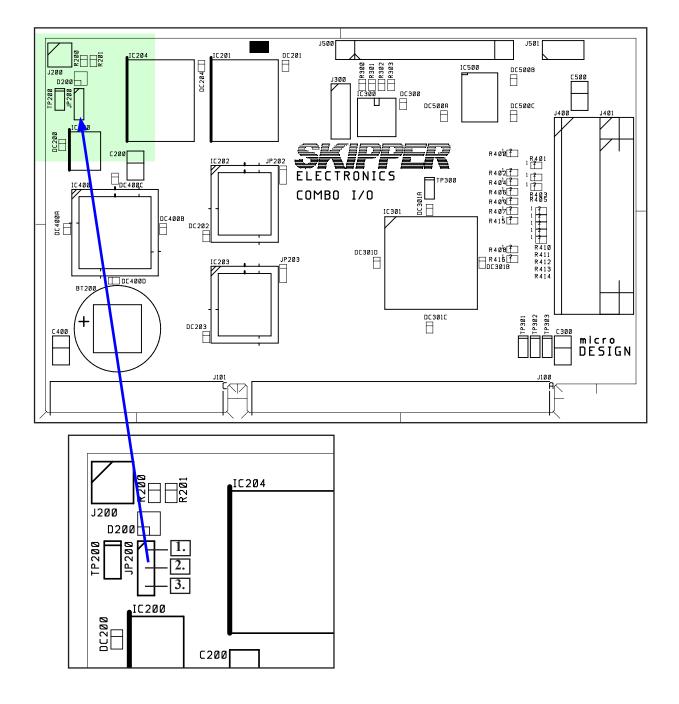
Back-up Battery Jumper, I/O Board.
